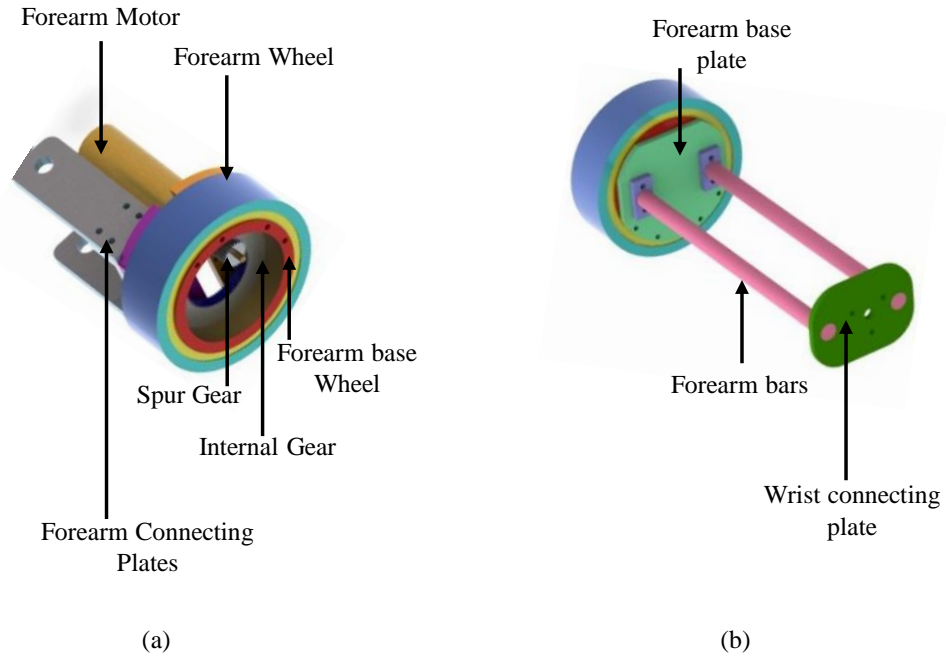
3D Model of forearm assembly, (a) part 1, (b) part 2
